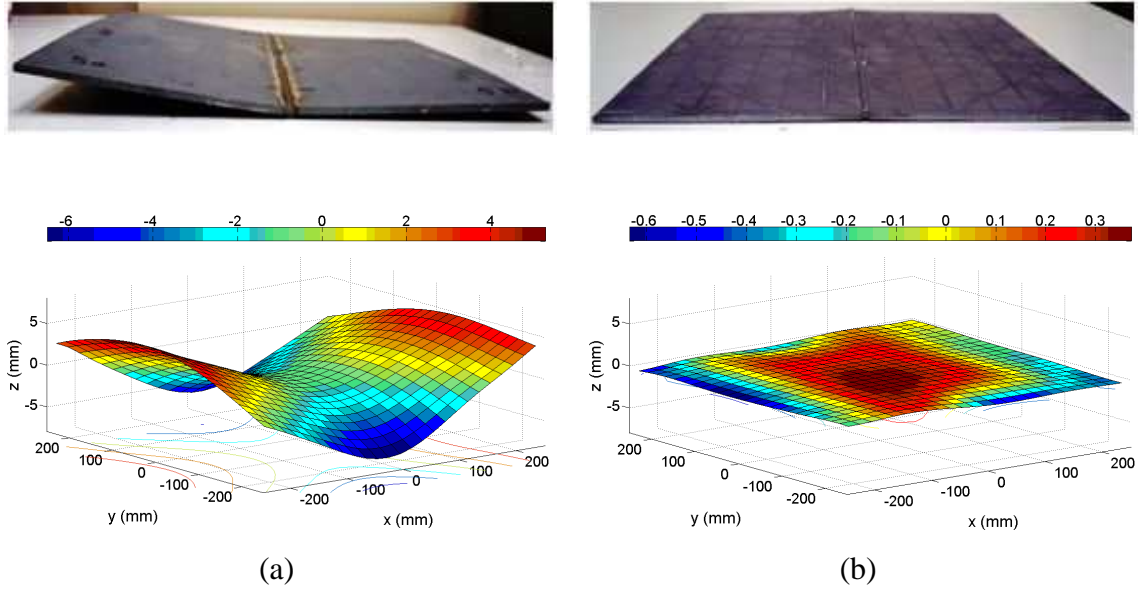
Iterative laser straightened (ILS) DH36 butt welded plate; (a) Distorted shape after welding; (b) Final shape after ILS; (sample: LFI92, supplied by the BAE-shipyard in Govan). The colour scale of the vertical z -deflection is in [mm].
